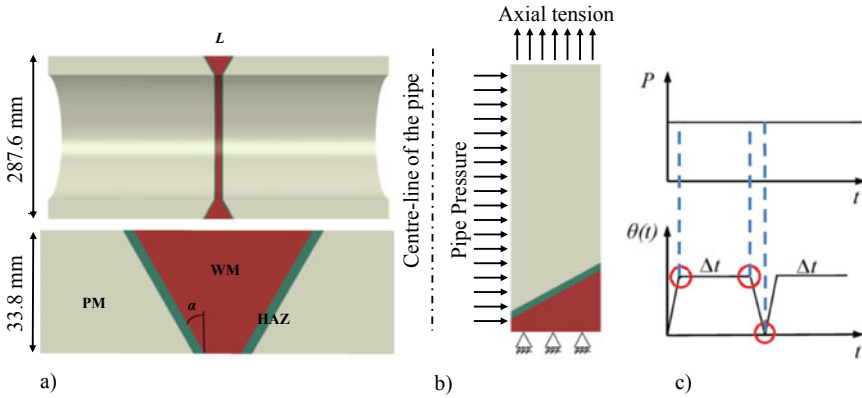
a) Butt welded pipe geometry. b) Boundary condition and load applied; c) loading condition of the pipe
